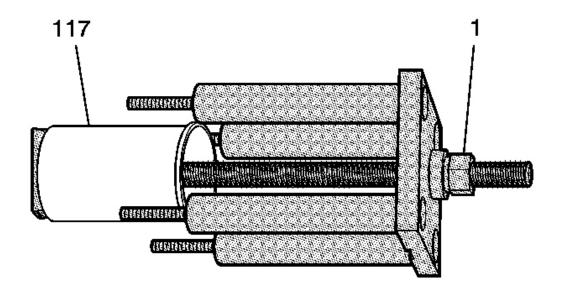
Removing Cylinder Bore Sleeve Courtesy of GENERAL MOTORS CORP.
